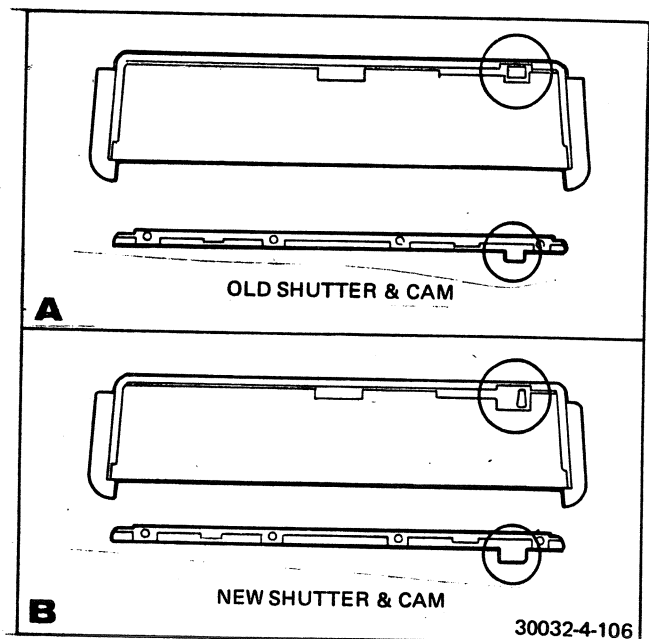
FRONT COVER LIGHT SHIELD CAM
